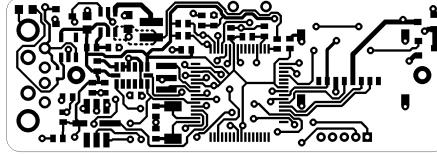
Second μPINPoint prototype PCB artwork top layer (actual size).
